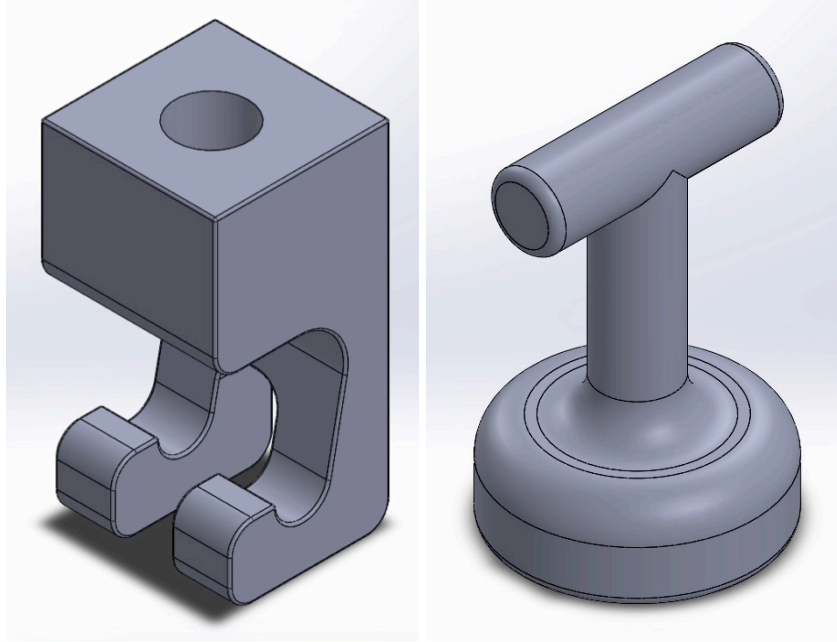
Fixture hook and button CAD models. The hook design for the upper portion of the fixture, next to the button design. The slot between the prongs prevents the button from wiggling while testing. The final button design allows for easy sample loading and realignment during testing.
